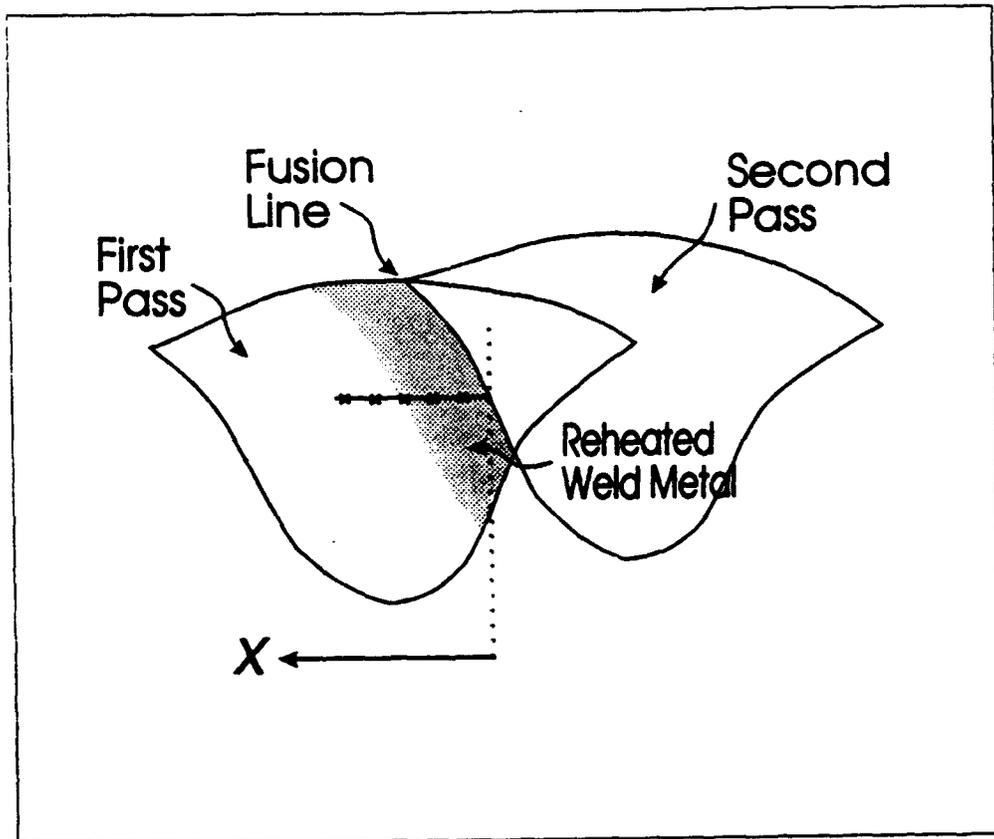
Schematic drawing illustrating the reheated zone in a weld bead during multi-pass welding. The points indicate the locations where chemical composition and hardness measurements were taken.
